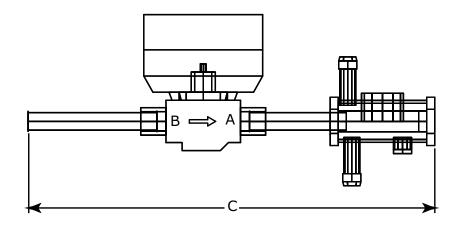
Two-way 1 1/4-in. valve deluxe piping package
